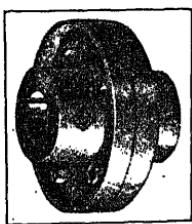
Flanged shaft coupling. Dodge Sales and Engineering Company, Mishawaka, Ind.
